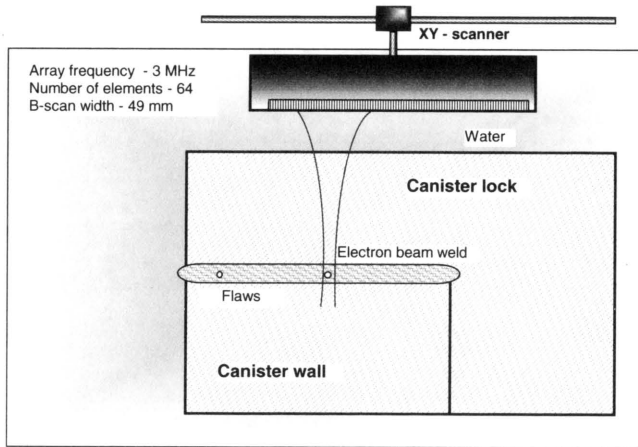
Canister section with drilled holes in EB weld used in experiments.
